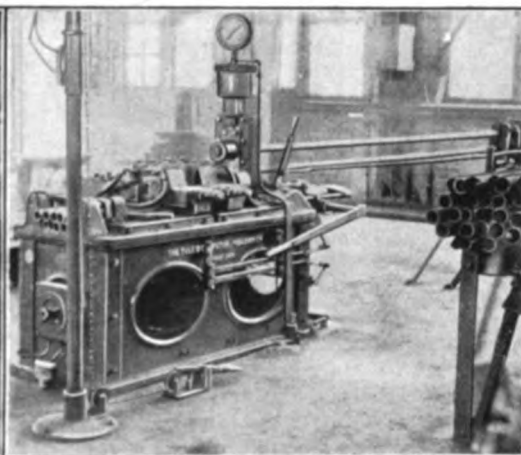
FRONT VIEW OF WELDING MACHINE
